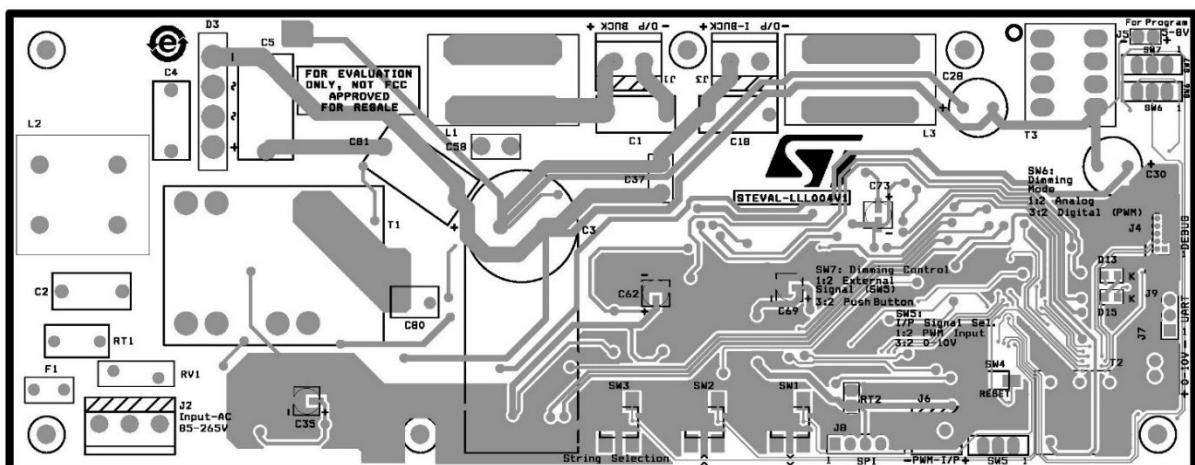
STEVAL-LLL004V1 layout bottom layer silk screen and drill
